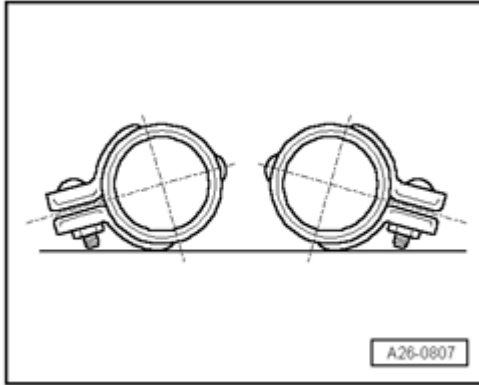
Adjusting Front Double Clamps So Bolt Ends Do Not Project Over Lower Edges Of Double Clamps
